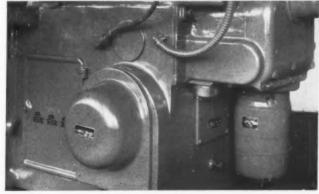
Top—Door opened to reveal auxiliary control, and also showing dwell relays on inside of door
